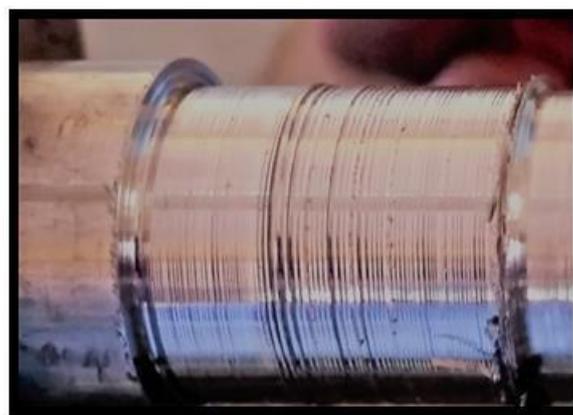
(A): Variation in surface finishing of workpiece when it is machined with worn out tool
